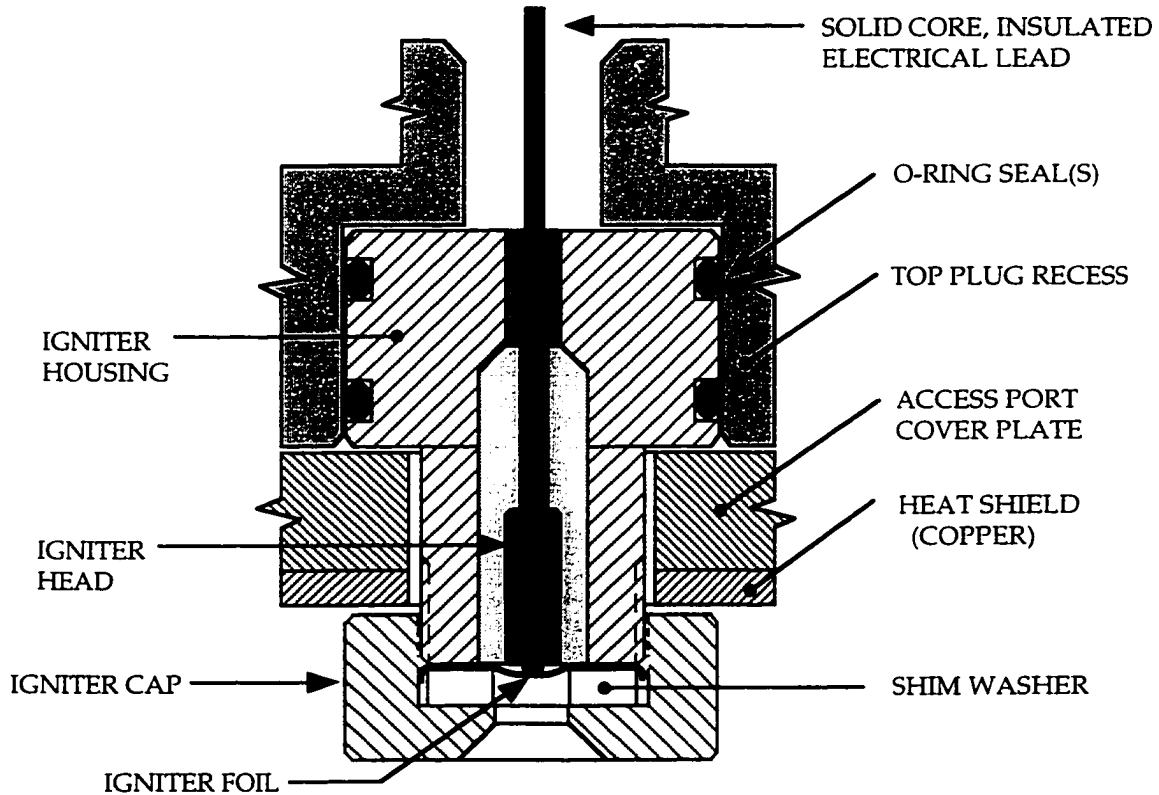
Schematic of foil-type igniter used in the combustion chamber experiments. Igniter assembly is shown installed in top plug access port.
